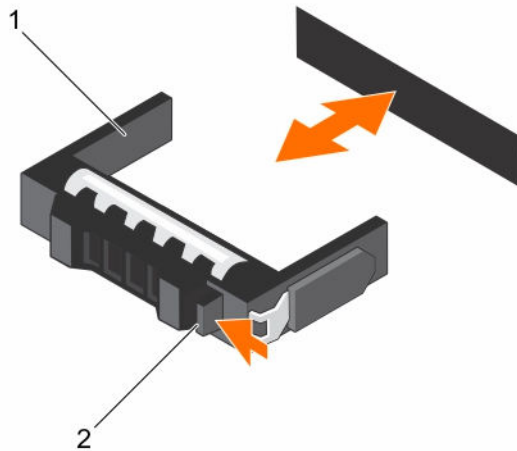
Removing and installing a 3.5-inch hot swappable hard drive carrier blank
